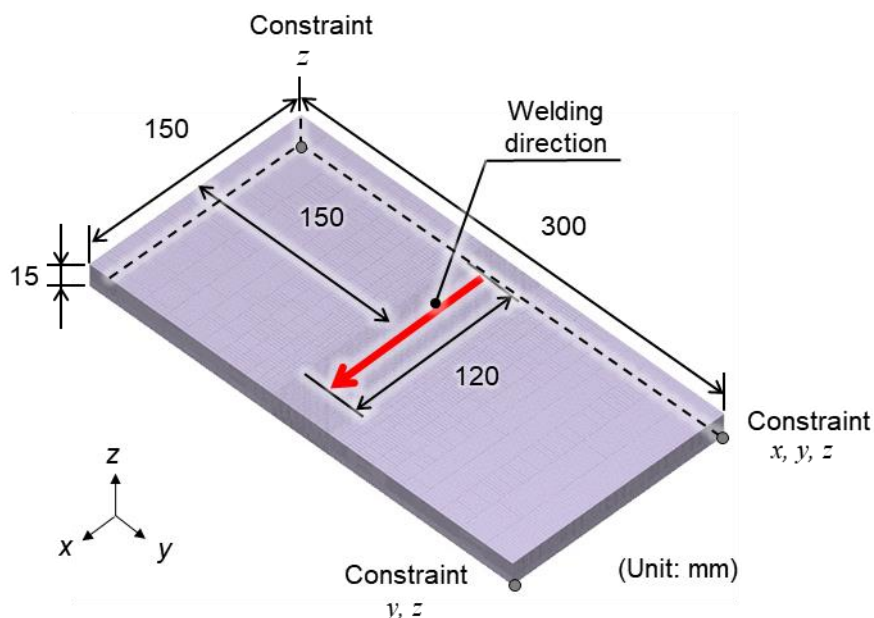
Configuration of 2-pass bead-on-plate welded joint.
